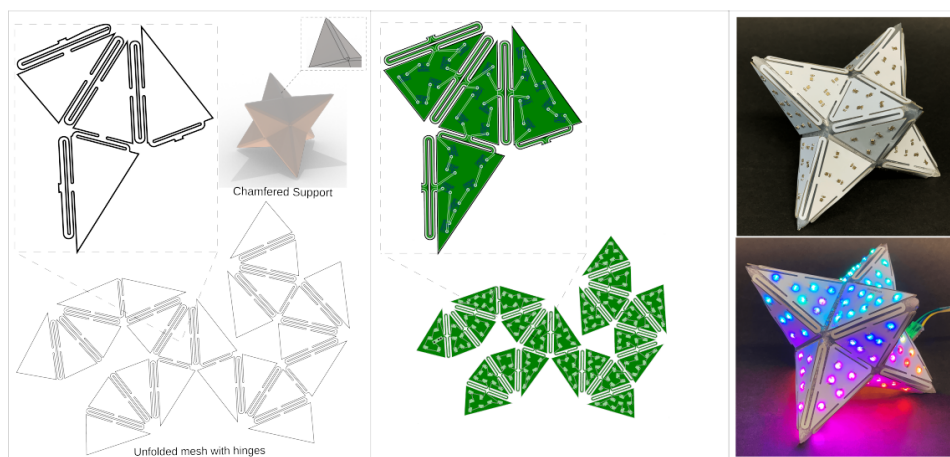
3D circuits by bending rigid PCBs [17]
